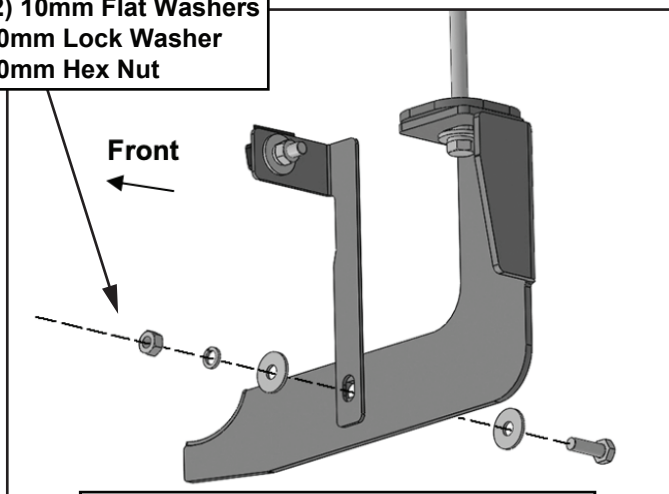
Passenger/Right Front Support Bracket attached to the Mounting Bracket
